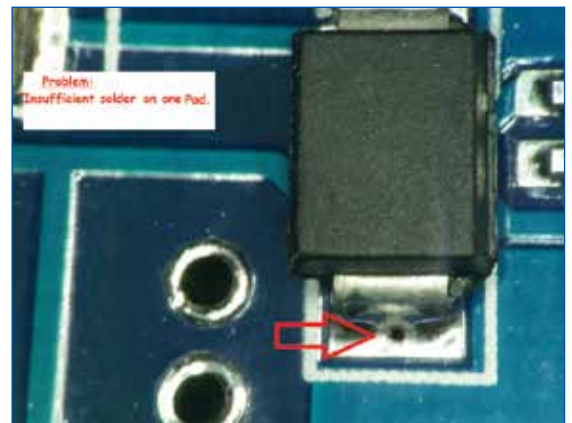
Insufficient solder, i.e., “starved” solder joint on an SMD pad.
